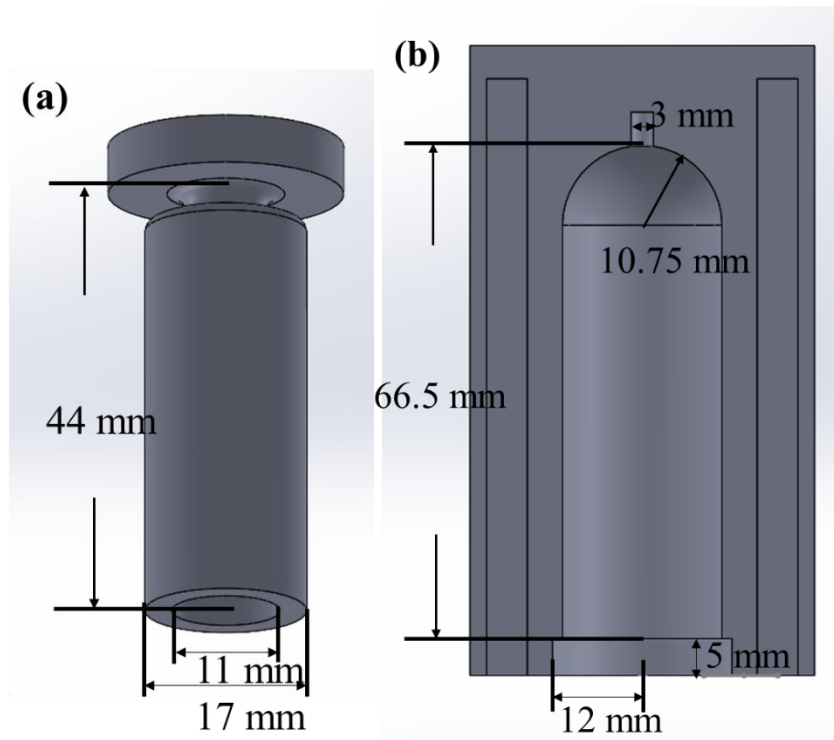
(a) 3-part mold double chamber inner rods and (b) 3-part mold double chamber base case
